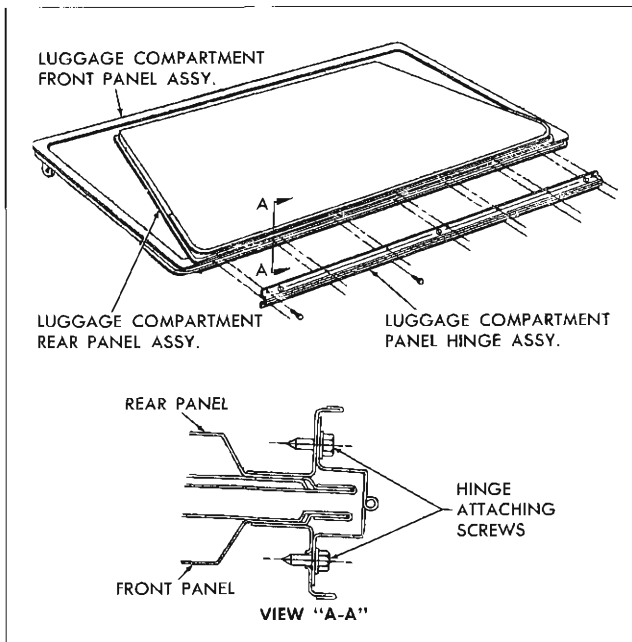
Front and Rear Panel Hinge - 35 Styles
